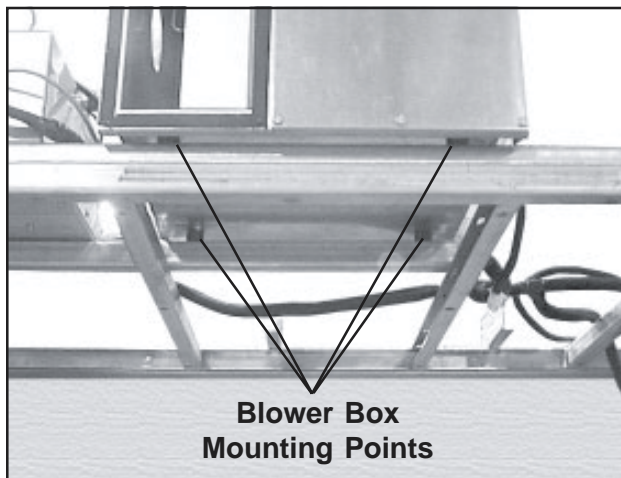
Blower Box on Base Frame (intake box shown - exhaust similar)
